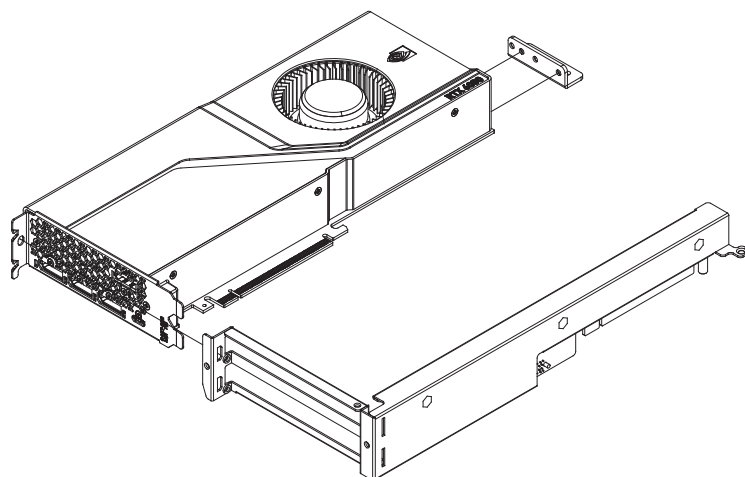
LR Module Assembly/LR 模塊安裝 /LR 模組安裝
